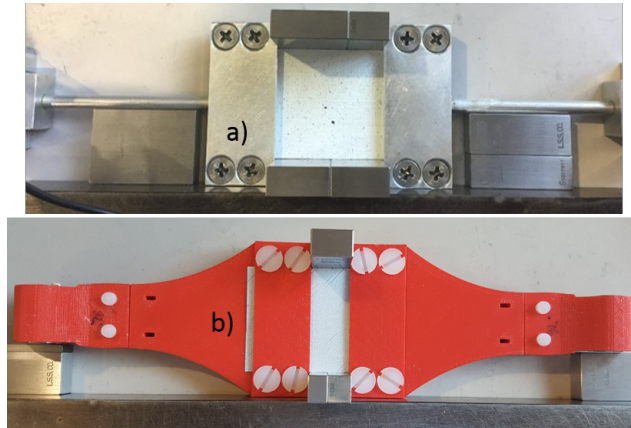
Alignment of a) v2 metal fixture and b) v7 plastic fixture with precision straight edge and precision blocks
